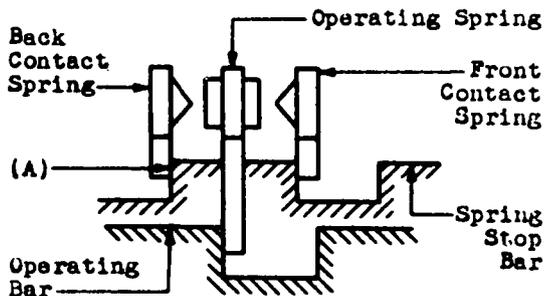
Tang Pressure - Transfer Spring Combination - Back Contact Spring
